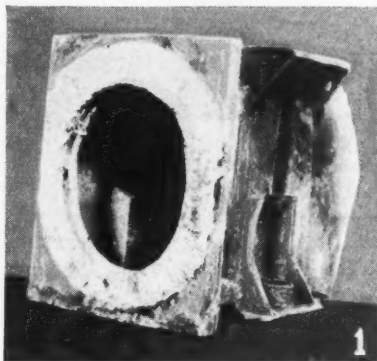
Journal box on which the dust guard plate has been built up by welding.
